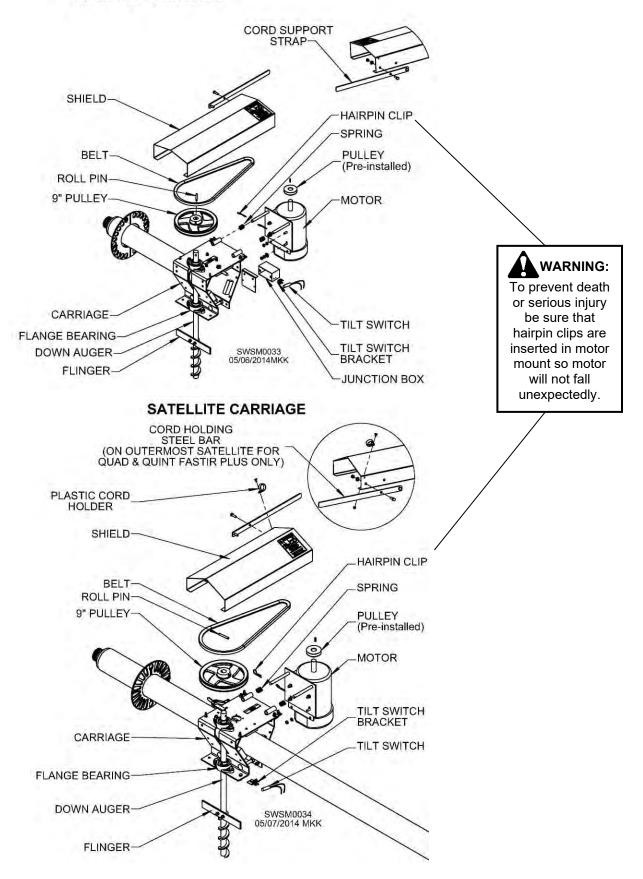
Exploded views of primary & satellite carriage assemblies
